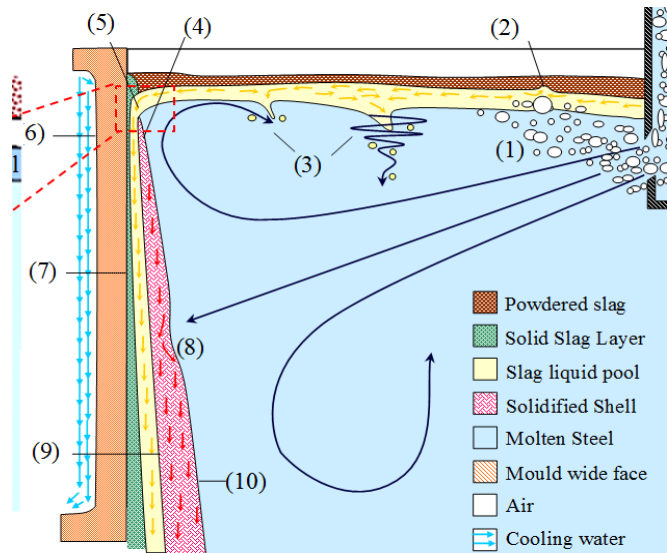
Schematic diagram showing half-section of continuous casting mould; steel shell = 4 & 10; liquid slag film = 9; solid slag film = 7; mould = 6 ¹³
